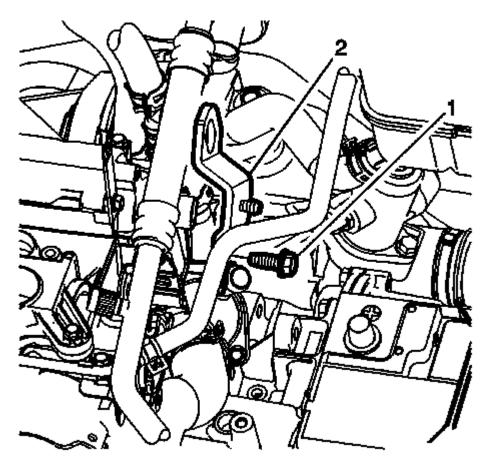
View Of Fixed Timing Chain Guide Access Plug Courtesy of GENERAL MOTORS COMPANY
